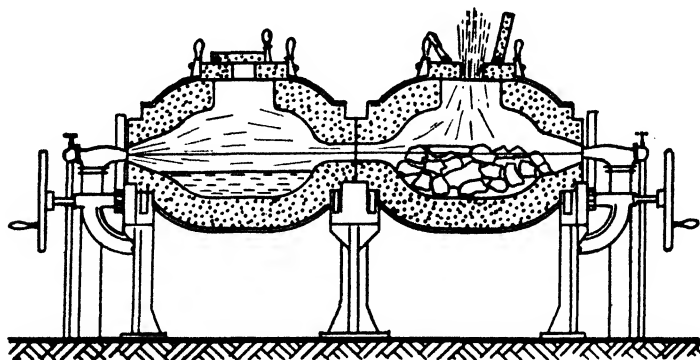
CROSS SECTION OF DOUBLE-CHAMBER BARREL FURNACE
